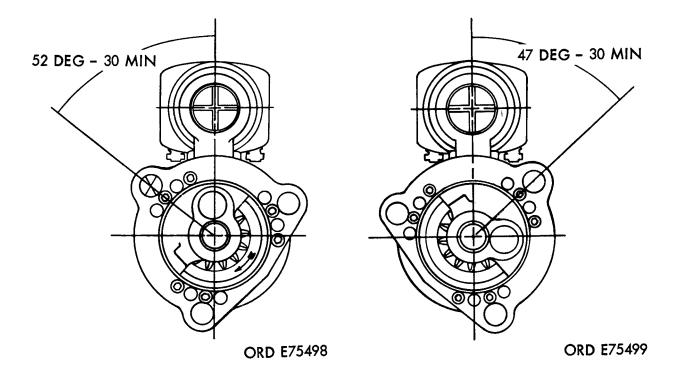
Drive housing position—model LDS-465-1 and LDS-465-1A engine application.
